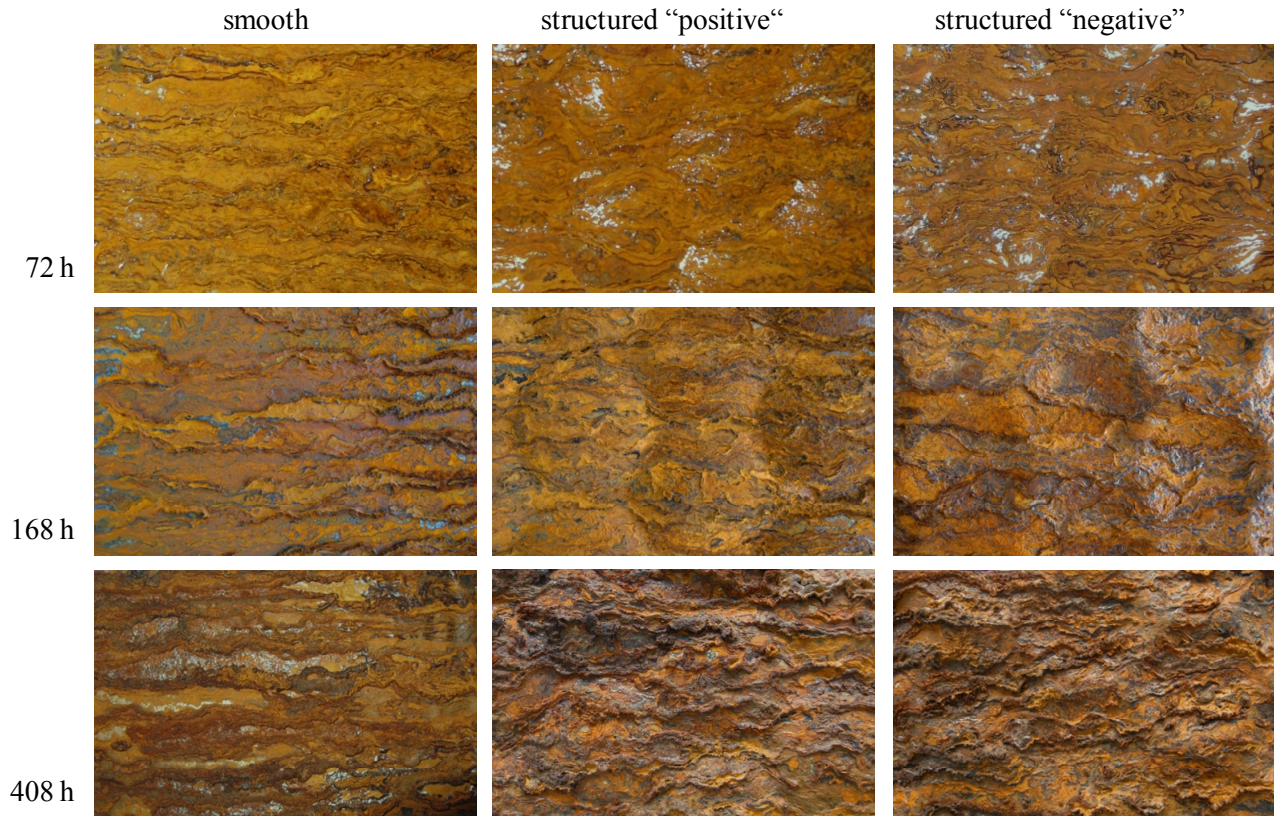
Specimen surfaces of sheet metals with corrosion products after 72 h, 168 h and 408 h of the corrosive environment exposure
